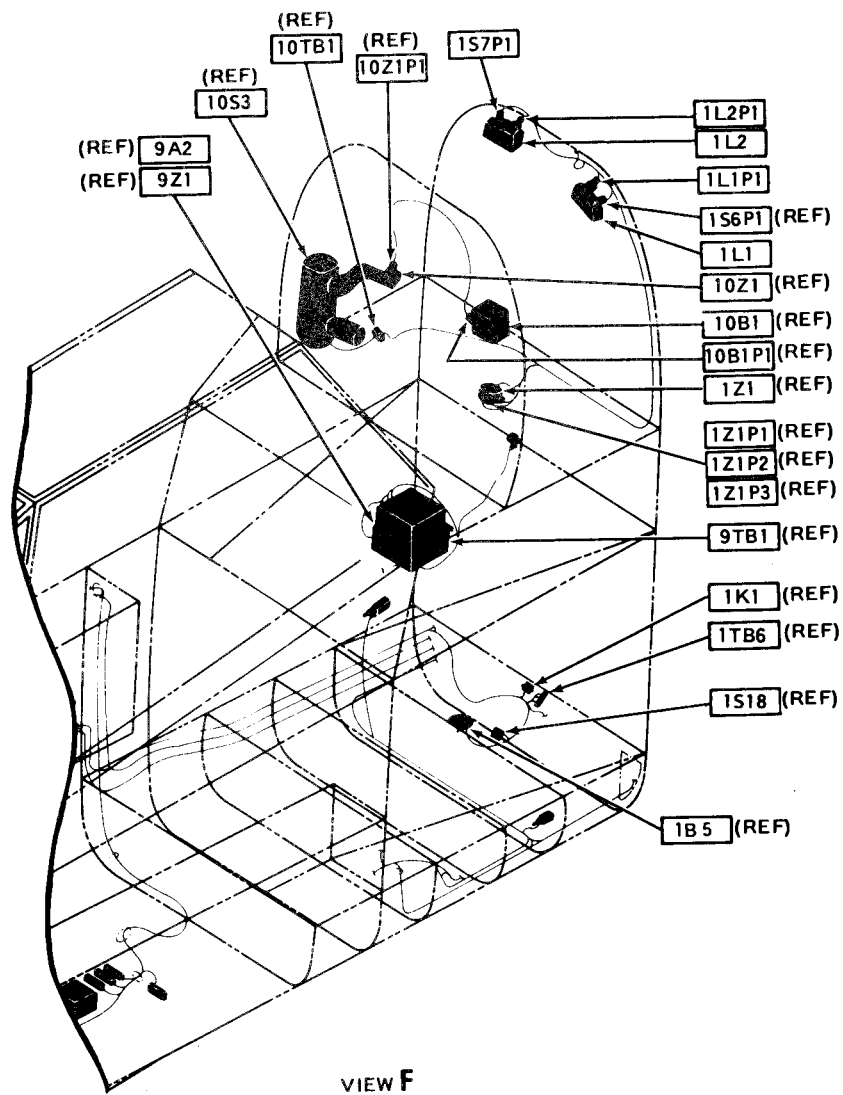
M | Hydraulic Control System (Equipment Location) (Sheet 7 of 10)
